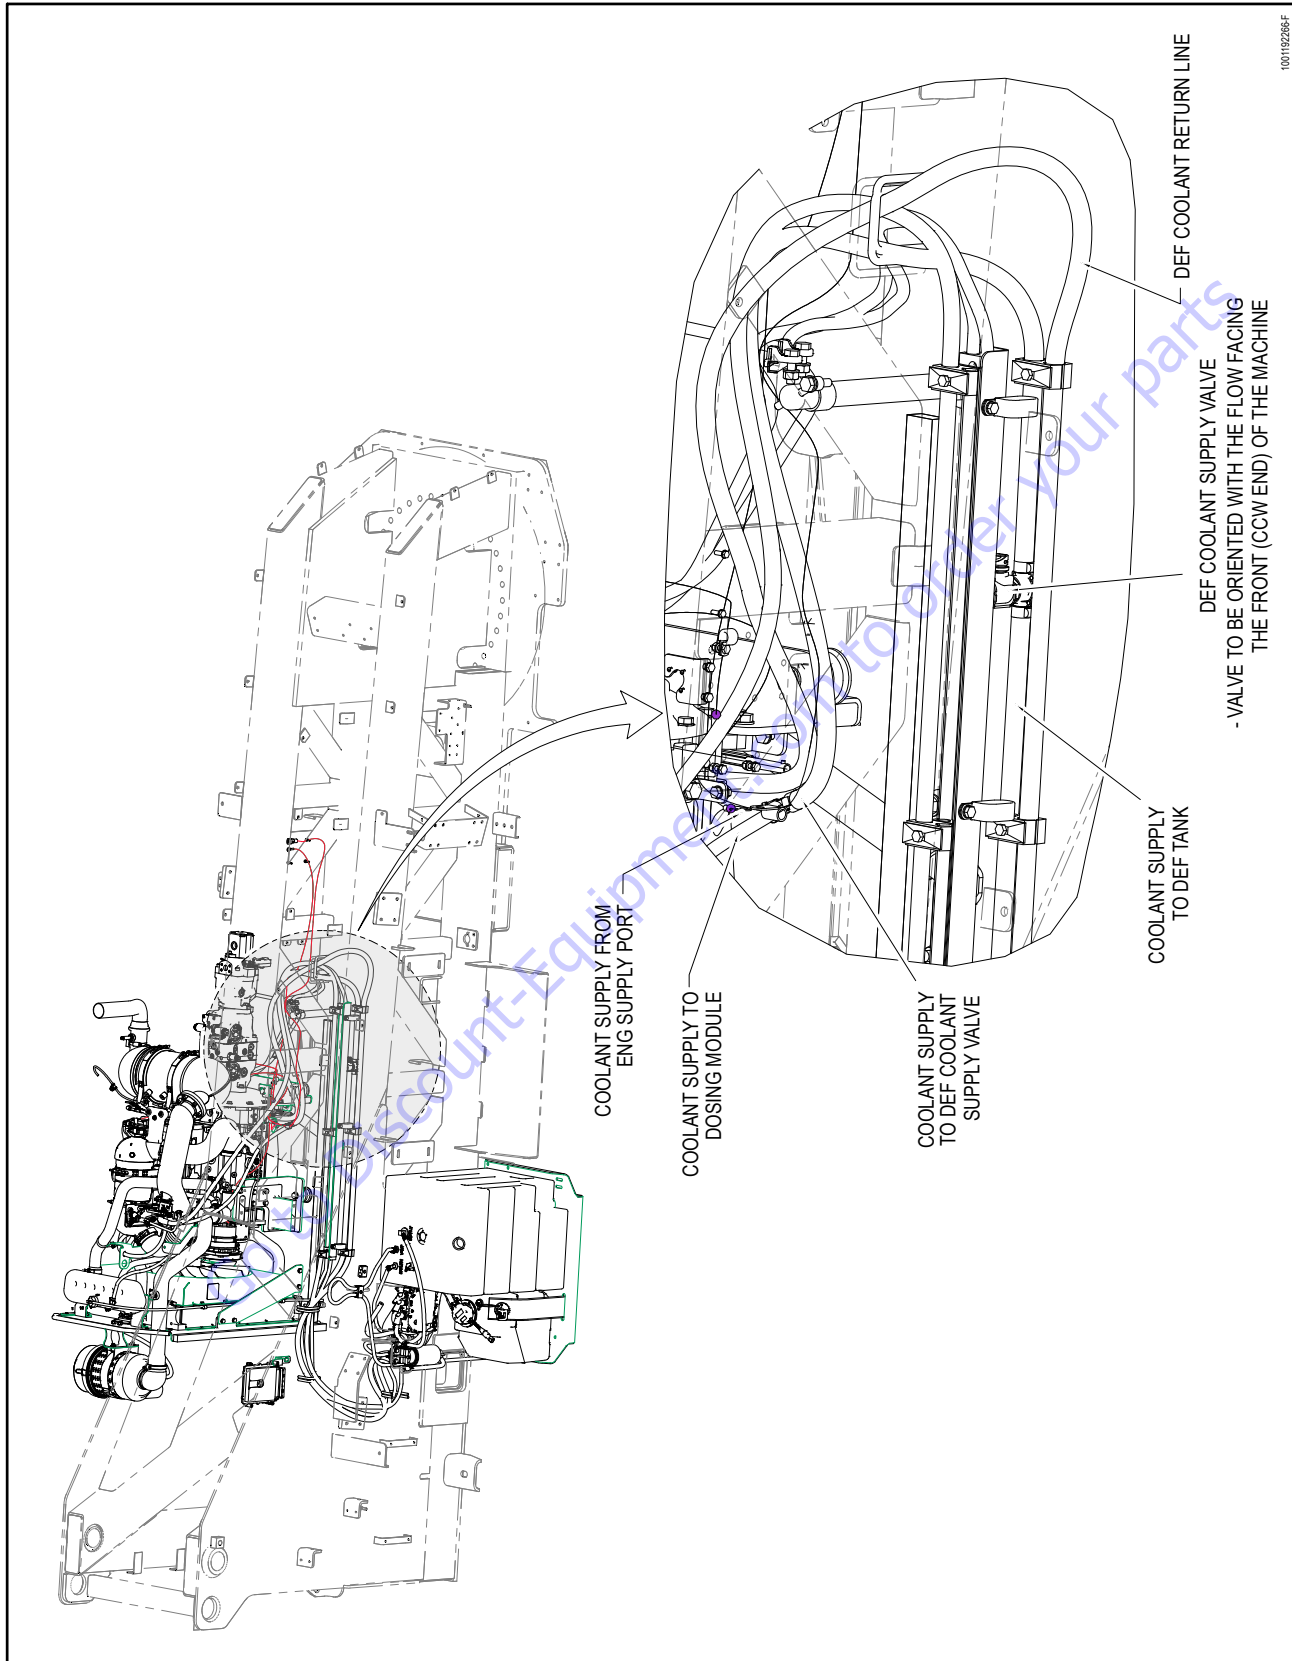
Engine Installation and Diesel Exhaust Fluid (DEF) System - Sheet 7 of 8
